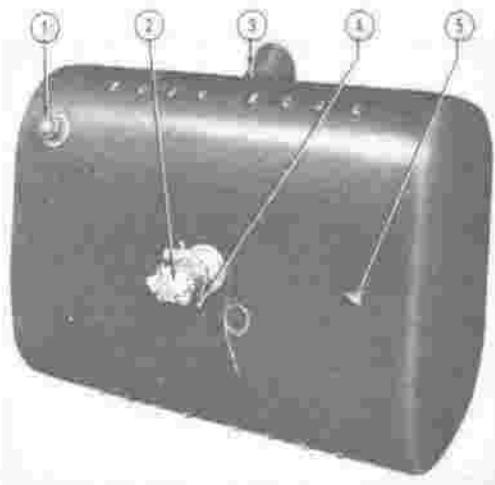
Auxiliary (Bomb Bay) Fuel Cell Installed (Looking Aft)
